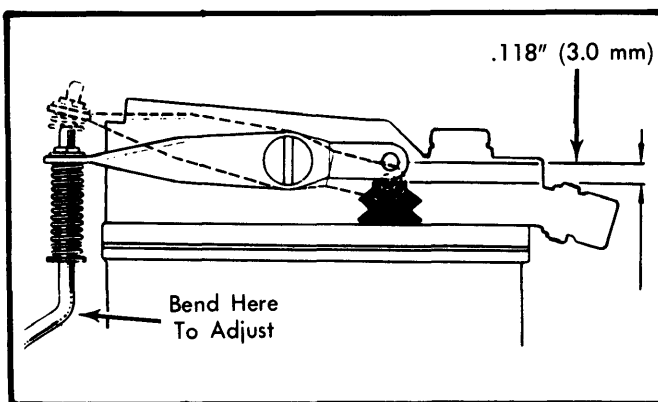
Carburetor Accelerator Pump Stroke Adjustment
